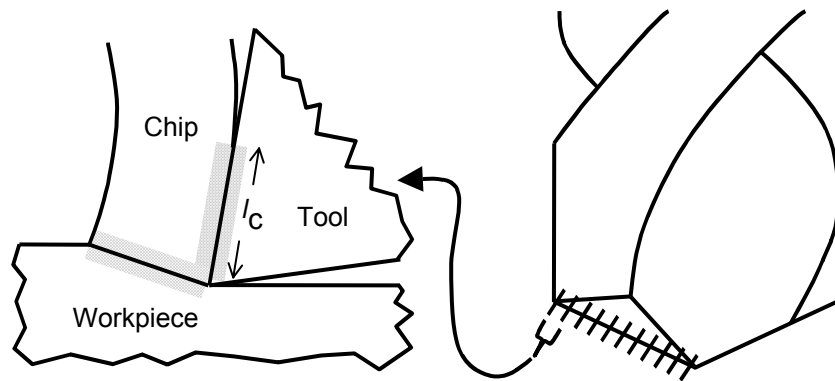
Elementary cutting tools along the cutting edges of the drill
